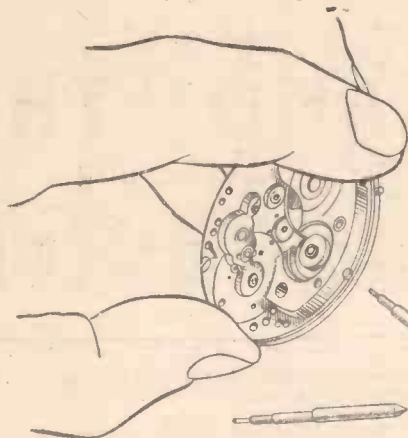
Hold the winding shaft in a hand vice and check it for wear in the movement.
